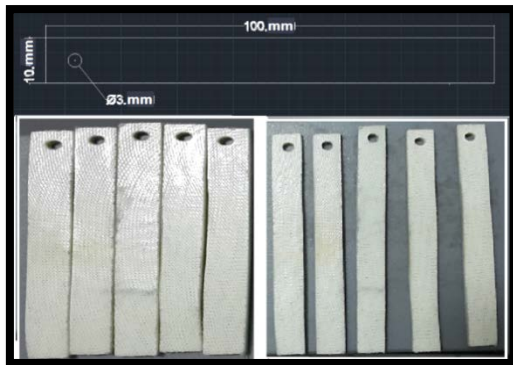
Fatigue test specimens and the dimensions for available and suggested material.
